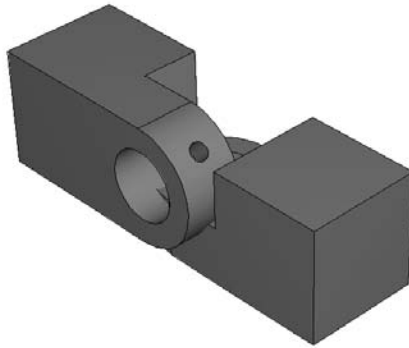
Position 1: Constrain the flange of the solid hinge piece to face the flange of the hinge piece with the lubrication hole.
